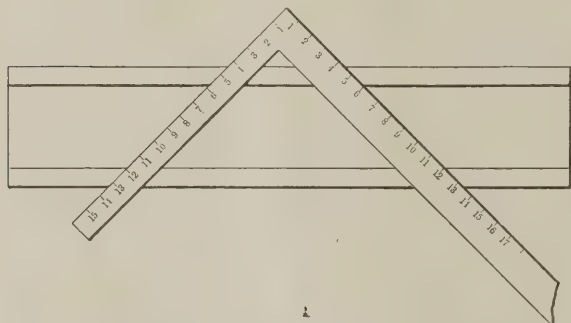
Plan View of Miter Box, Showing How the Cuts Are Marked with the Steel Square.
